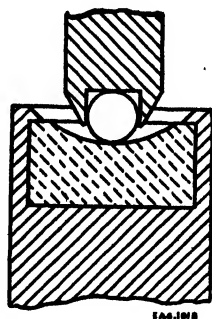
Bottom bearing in E.A.C. single-phase meter.
